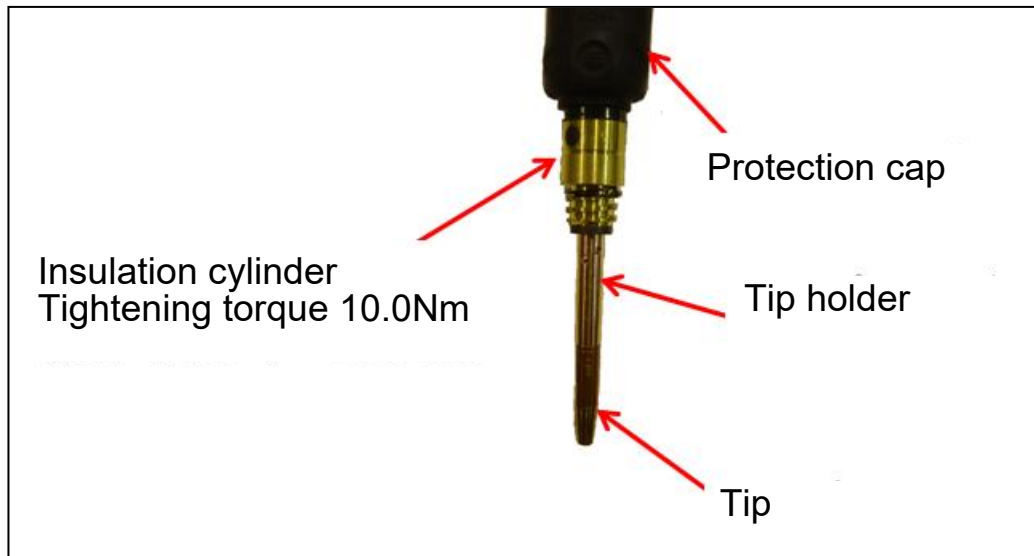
(b) Removing the insulated cap and the tip holder
